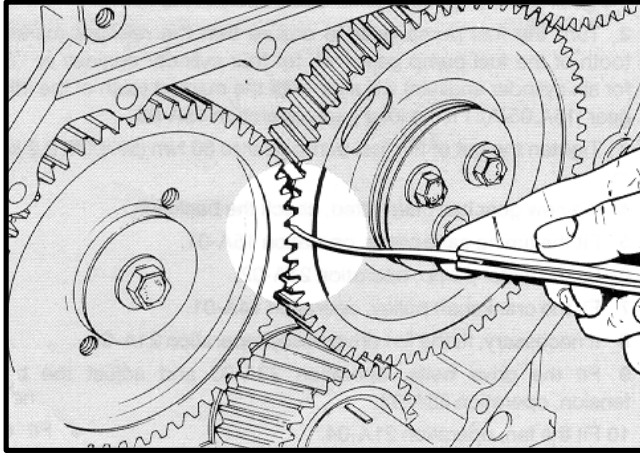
CHECK THE TIMING GEAR CLEARANCES
